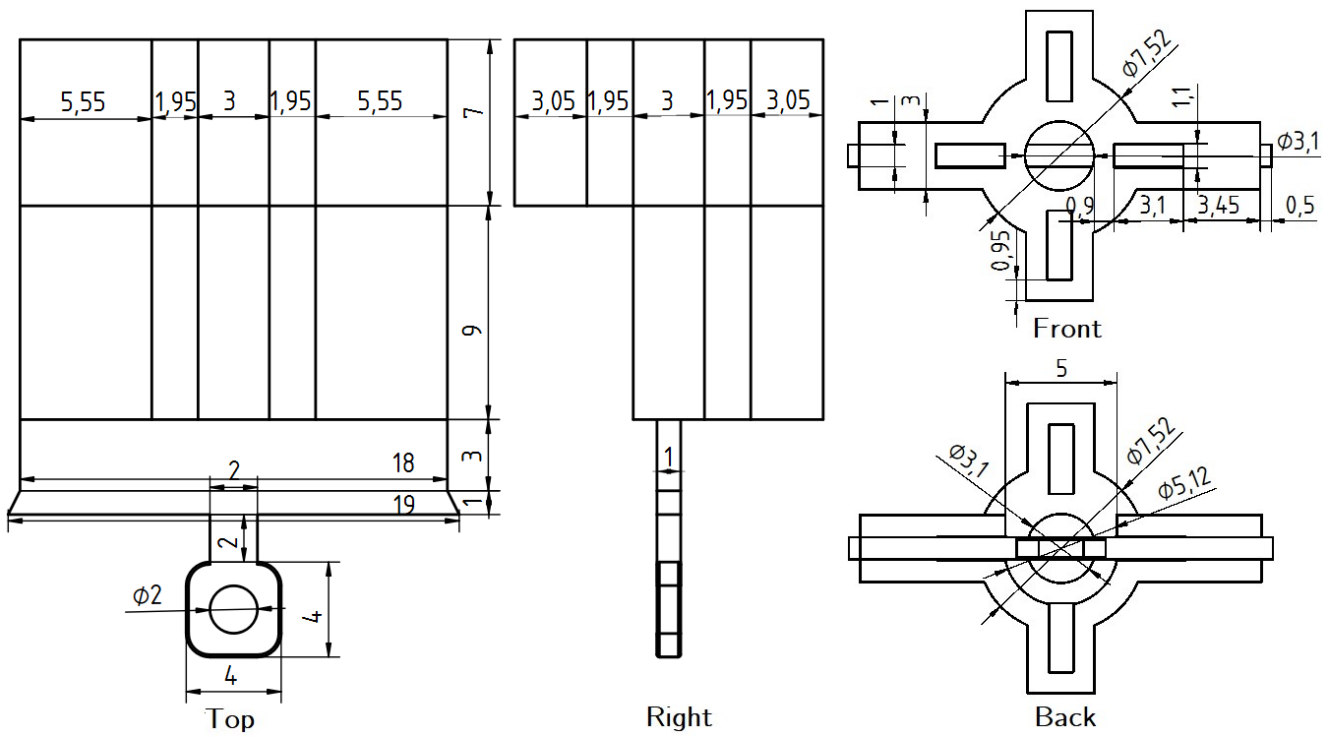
Technical drawing of bulk holder that restricts rotation. Units of length are in millimeters.
